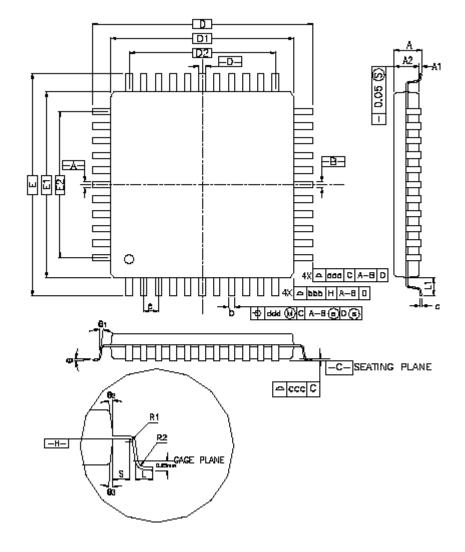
64- and 48-lead LQFP Package Drawing
